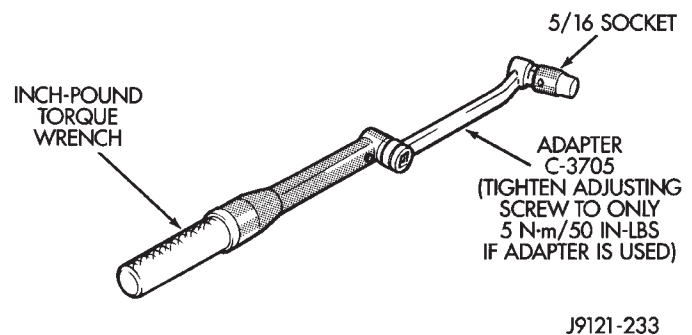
Using Band Adjustment Adapter Tool C-3705
